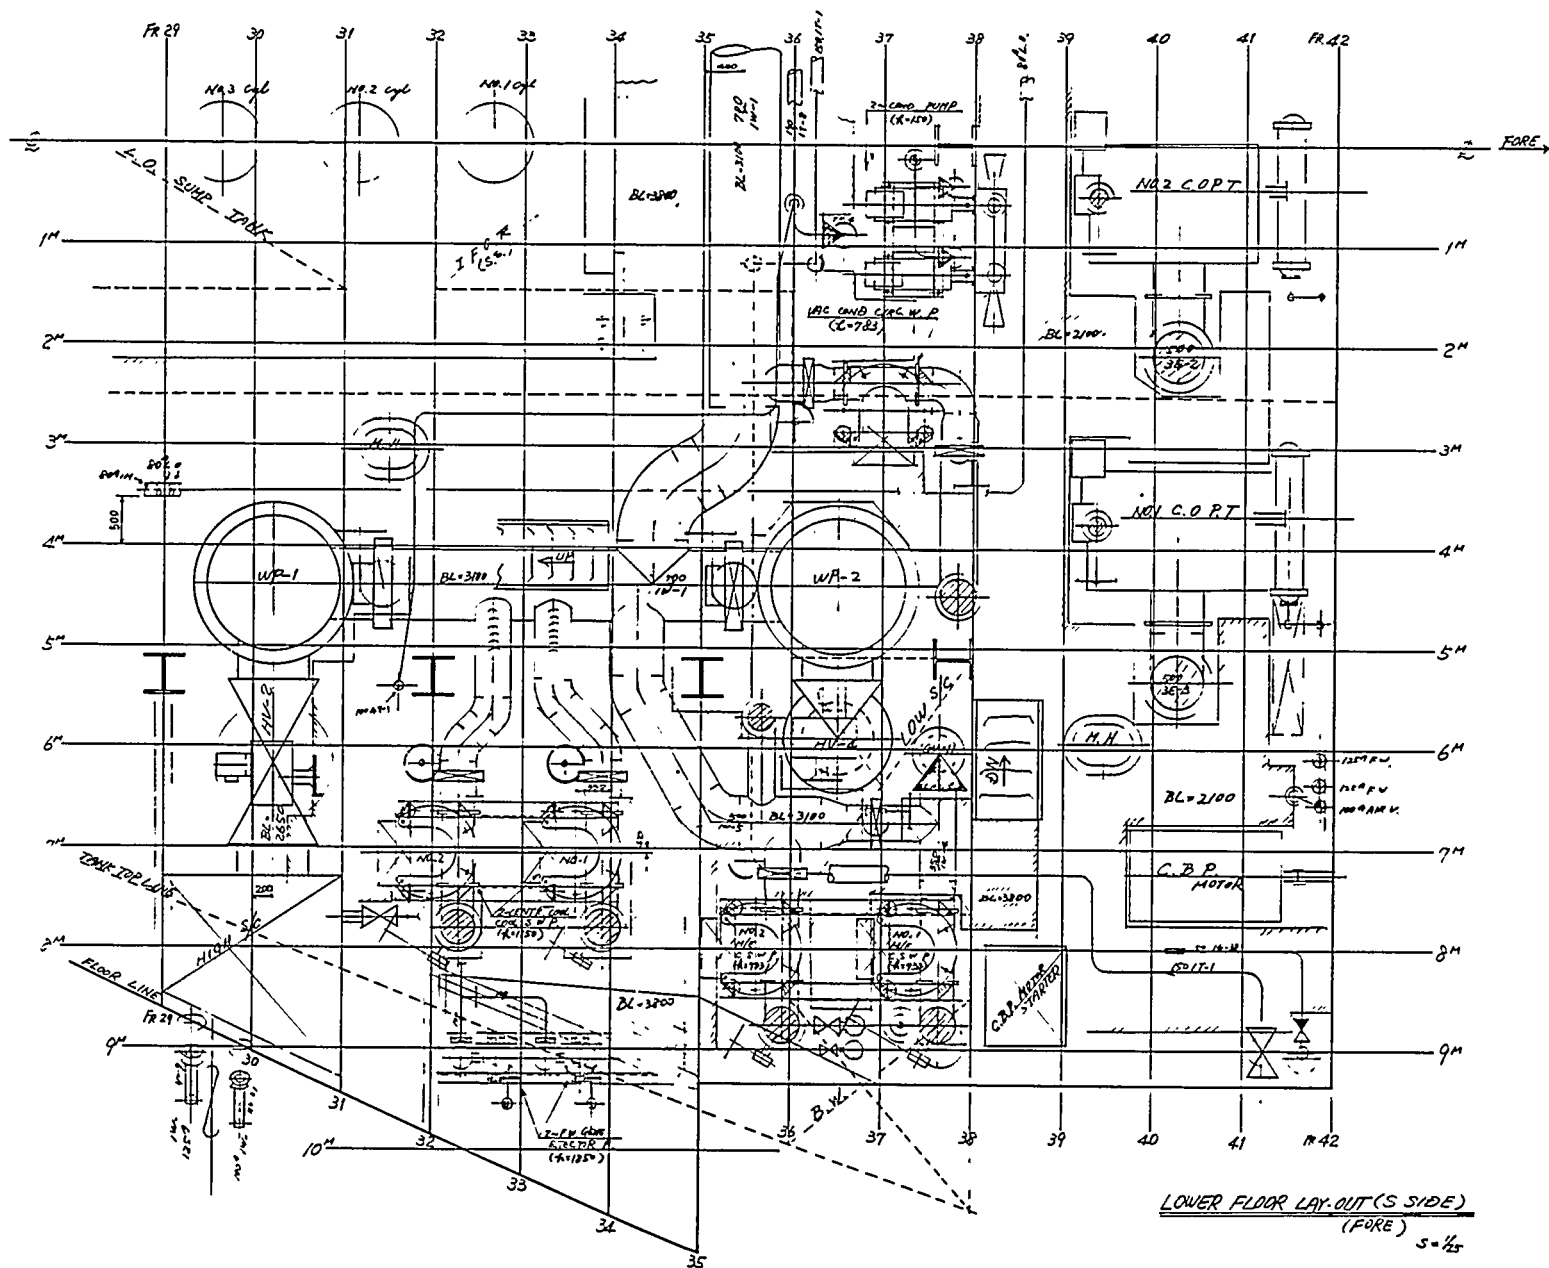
(a): Rough Layout for an Engine-Room (Lower Floor).
